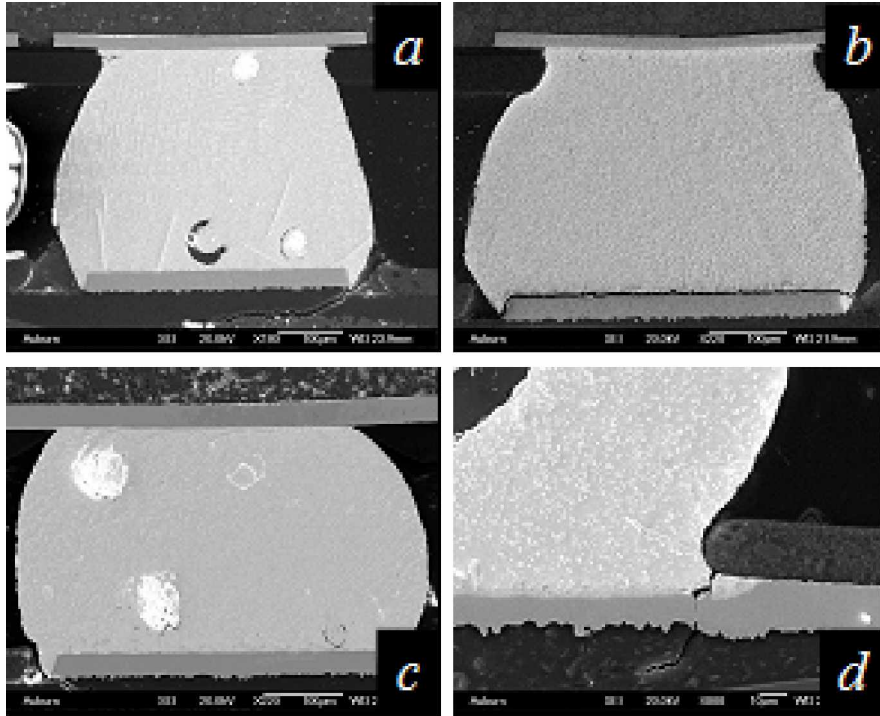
Failure modes, (a) Resin Crack (b) Solder-Copper pad on PCB-side(c) Solder-Copper pad on Package-side (d) Copper trace failure
